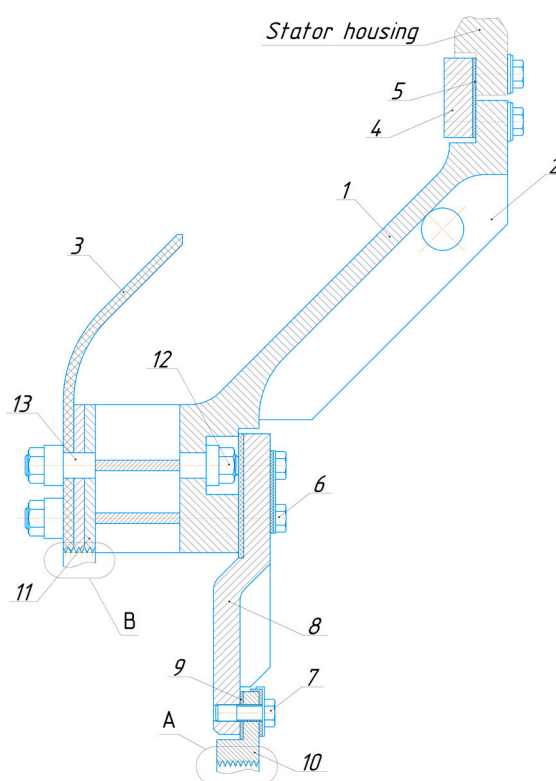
Drawing of the proposed structure for a diffuser shield: 1 – main element of attachment of blades; 2 – additional rib; 3 – diffuser cover disk; 4 – shield attachment ring to the diffuser; 5 – fiberglass gasket; 6 – bolted connection; 7 – bolted connection; 8 – flange; 9 – fiberglass gasket; 10 – rotor seal; 11 – shield seal; 12 – bolted connection; 13 – fiberglass sleeve
